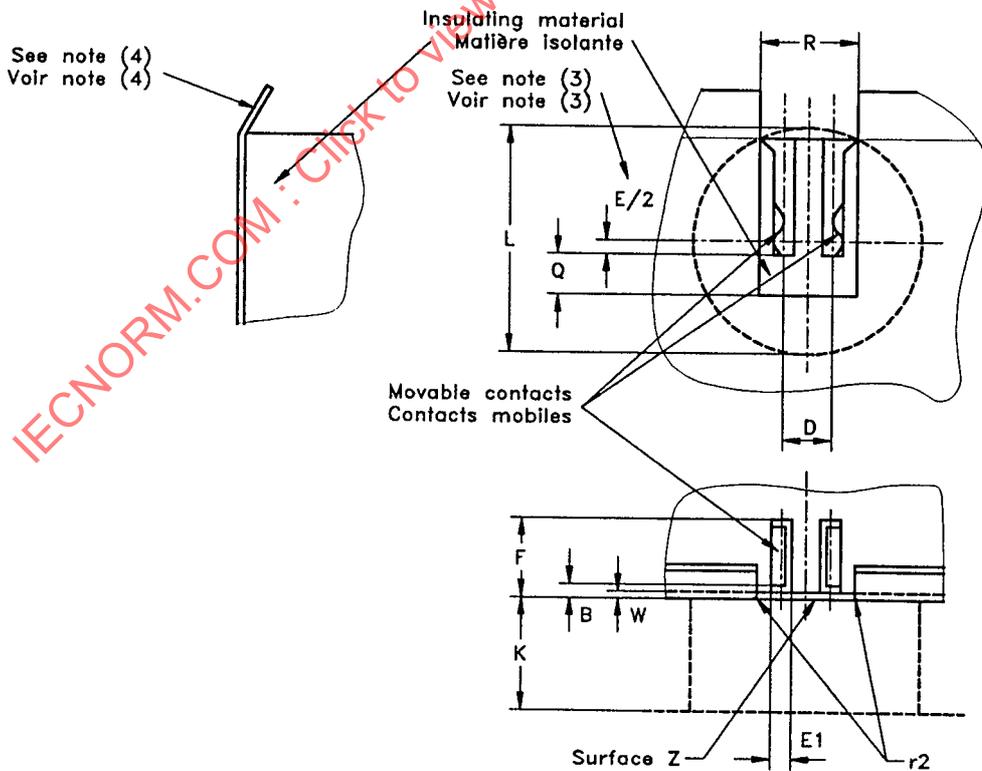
CONTACT ASSEMBLY WITH PARALLEL SLIDE-IN GROOVES
